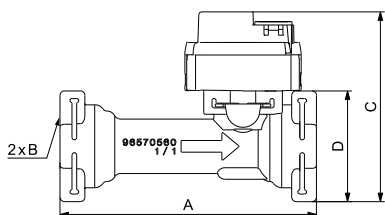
Dimensions, VFS, 2-40 l/min, without adapter
